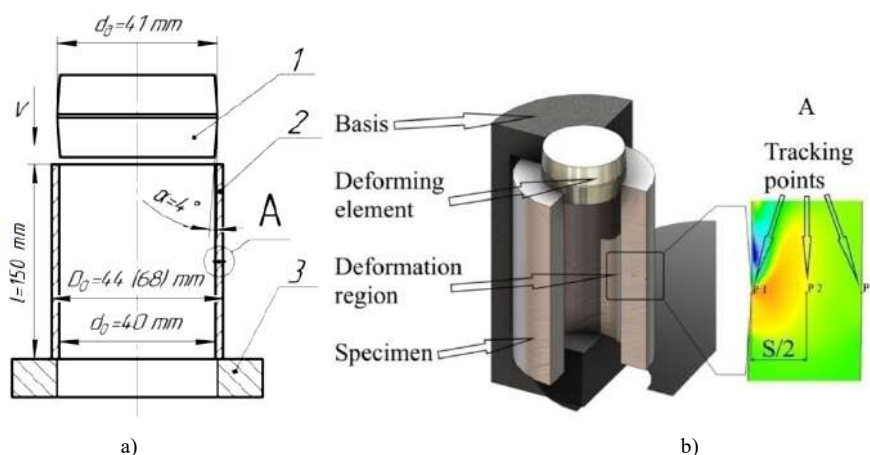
FEM model construction: a) workpiece with dimensions: 1 – deforming element; 2 – the studied axisymmetric workpiece; 3 – base; b) model scheme
